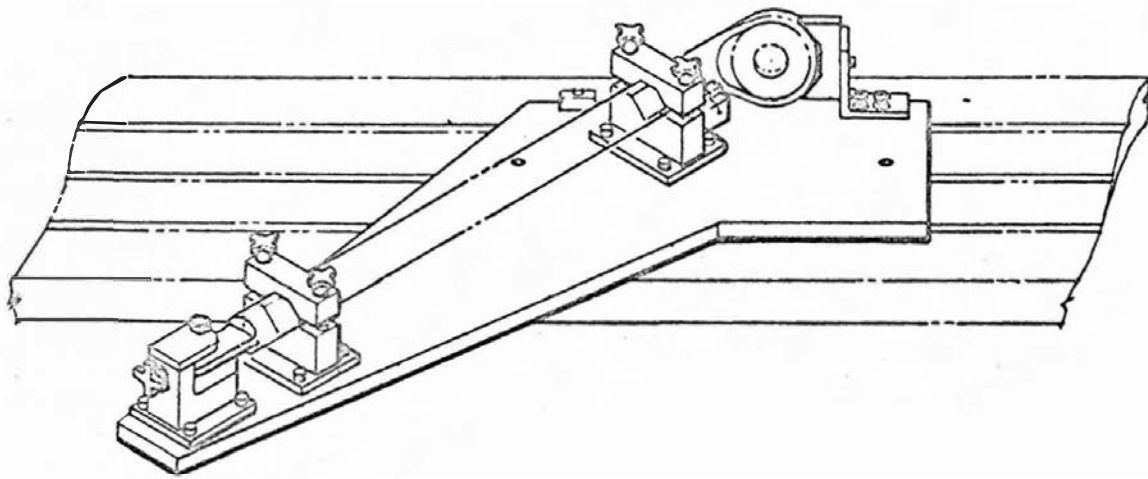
Lower Ring Actuator Support Strut Assemblies Mill Fixture
